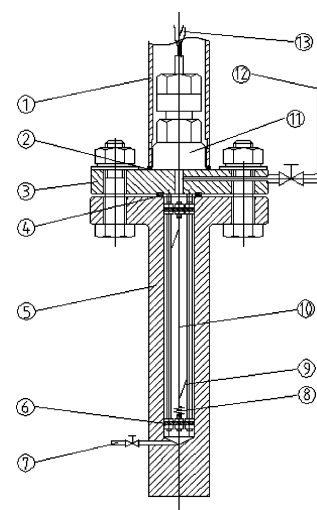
Hot-wire assembly: 1, steel cover; 2, Teflon O-ring; 3, flange; 4, Cu O-ring; 5, pressure vessel; 6, Teflon disk; 7, injecting pipeline; 8, spring; 9, leader; 10, platinum wire; 11, seal; 12, effusing pipeline; 13, leads.
